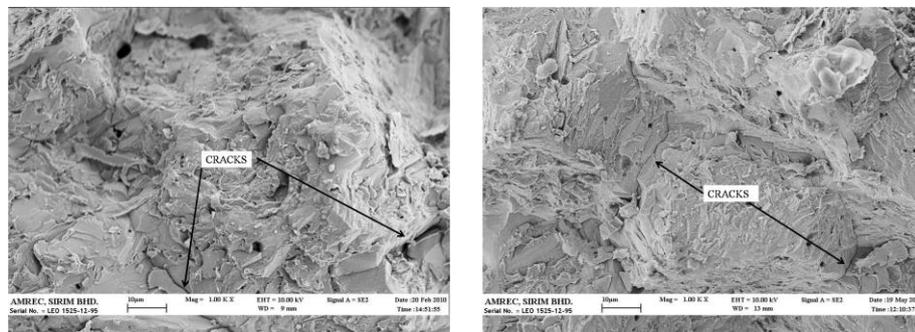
Fracture morphologies of of (a) PW part sintered at 1260°C, (b) PS part sintered at 1260°C
